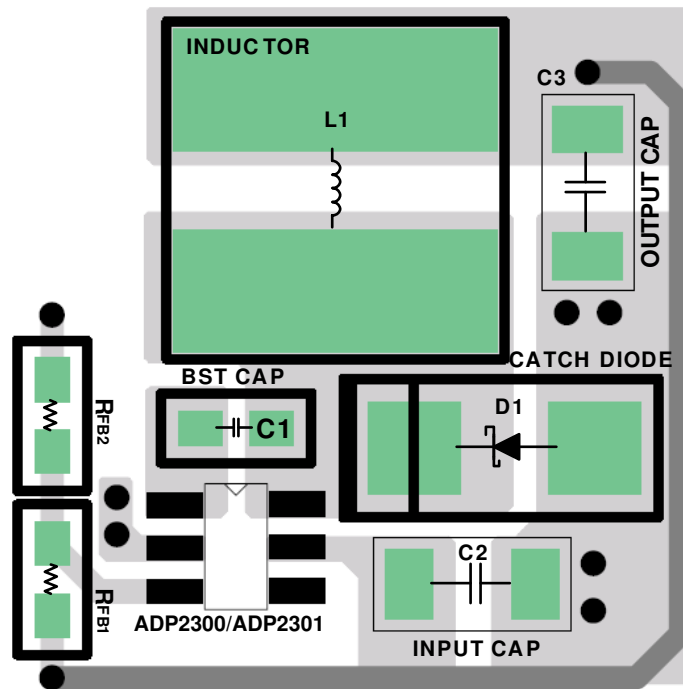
Recommended PCB Layout for the ADP2300/ADP2301
